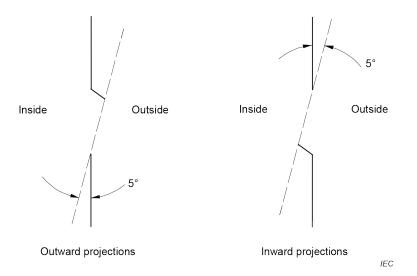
Examples of cross-sections of designs of side opening louvres which prevent vertical entry
